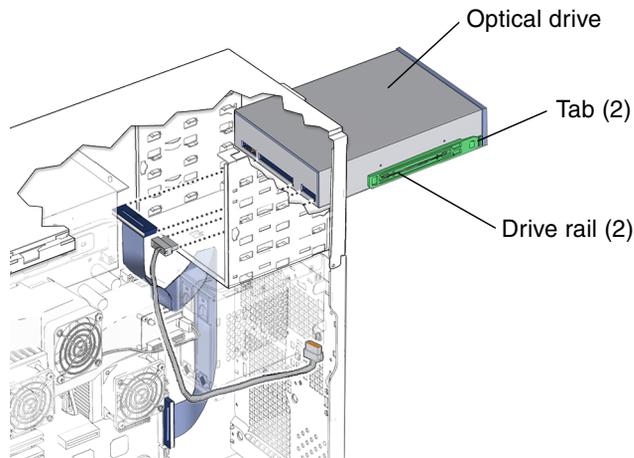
Removing the Optical Drive and Drive Rails
